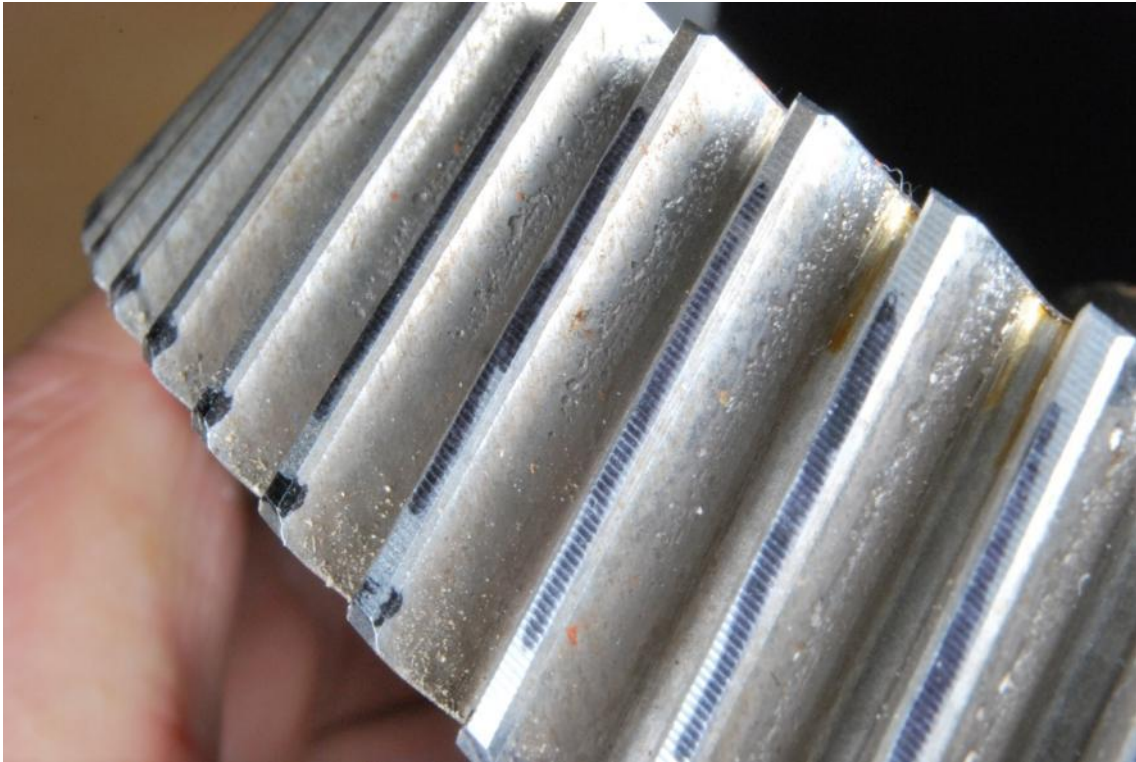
Callagher - On the driving side of the camshaft timing gear teeth, severe plastic yielding (peening/ rolling) damage is present, along with pitting and spalling.
